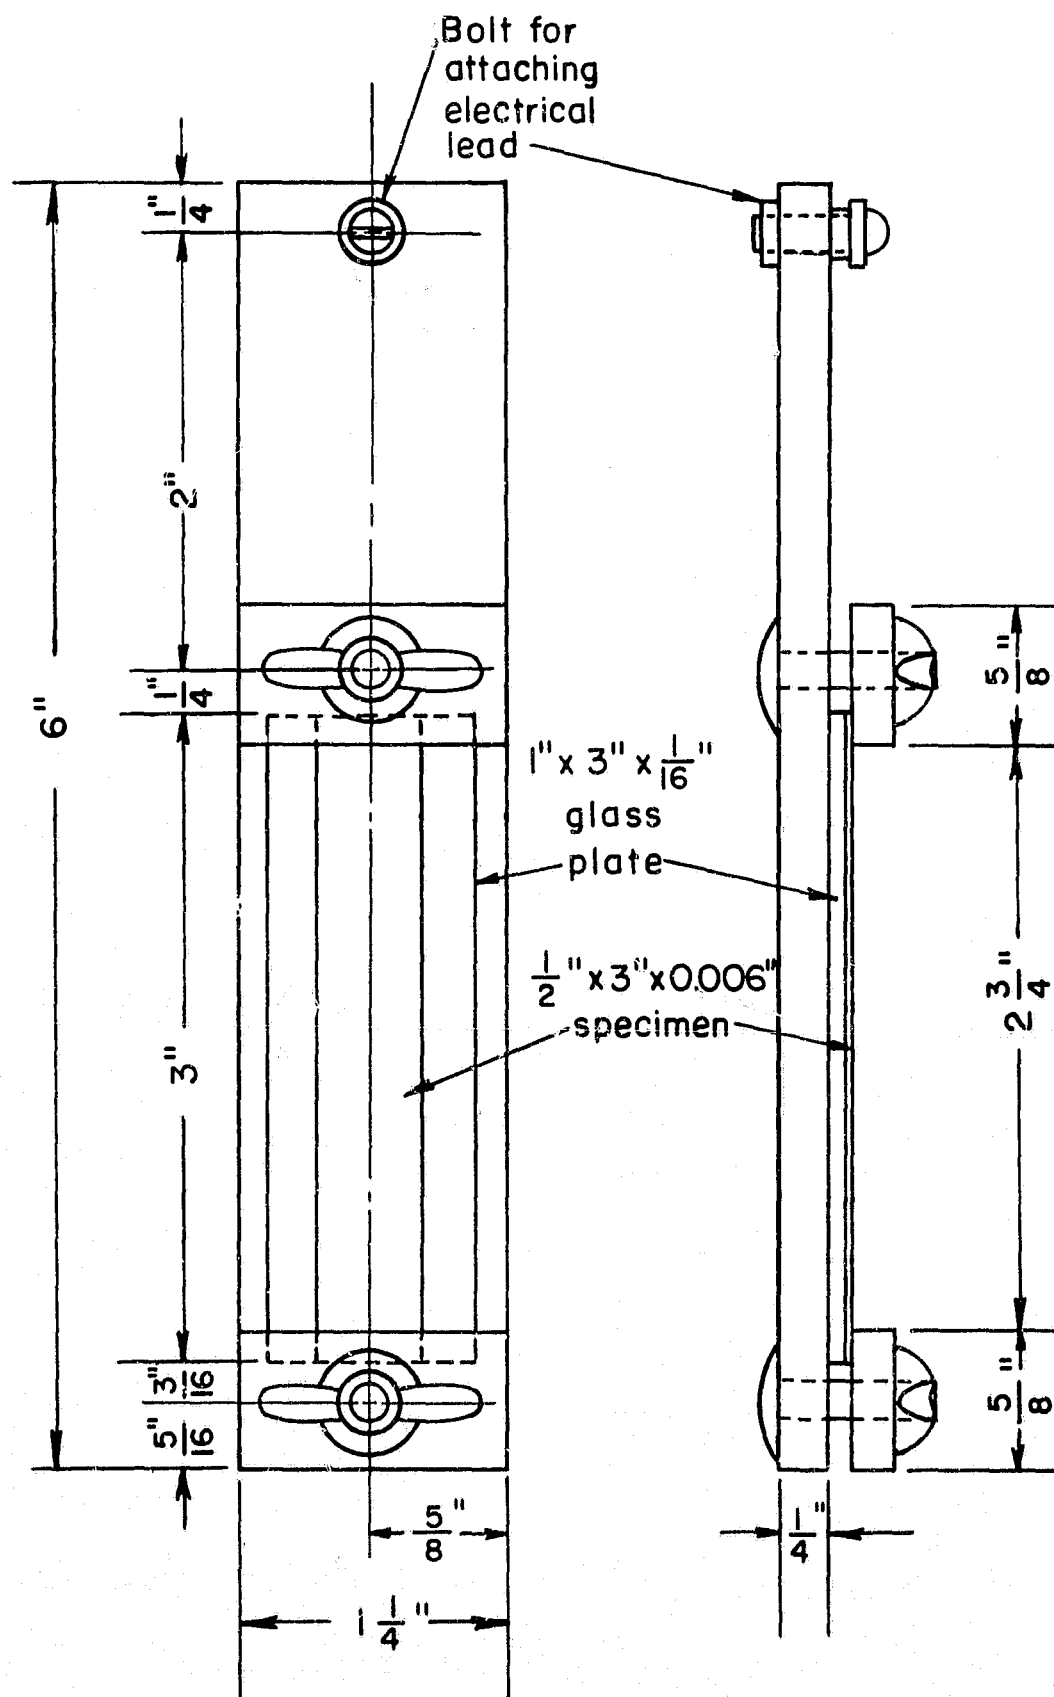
FIXTURE USED TO HOLD STRIP SPECIMENS DURING ELECTROPLATING
